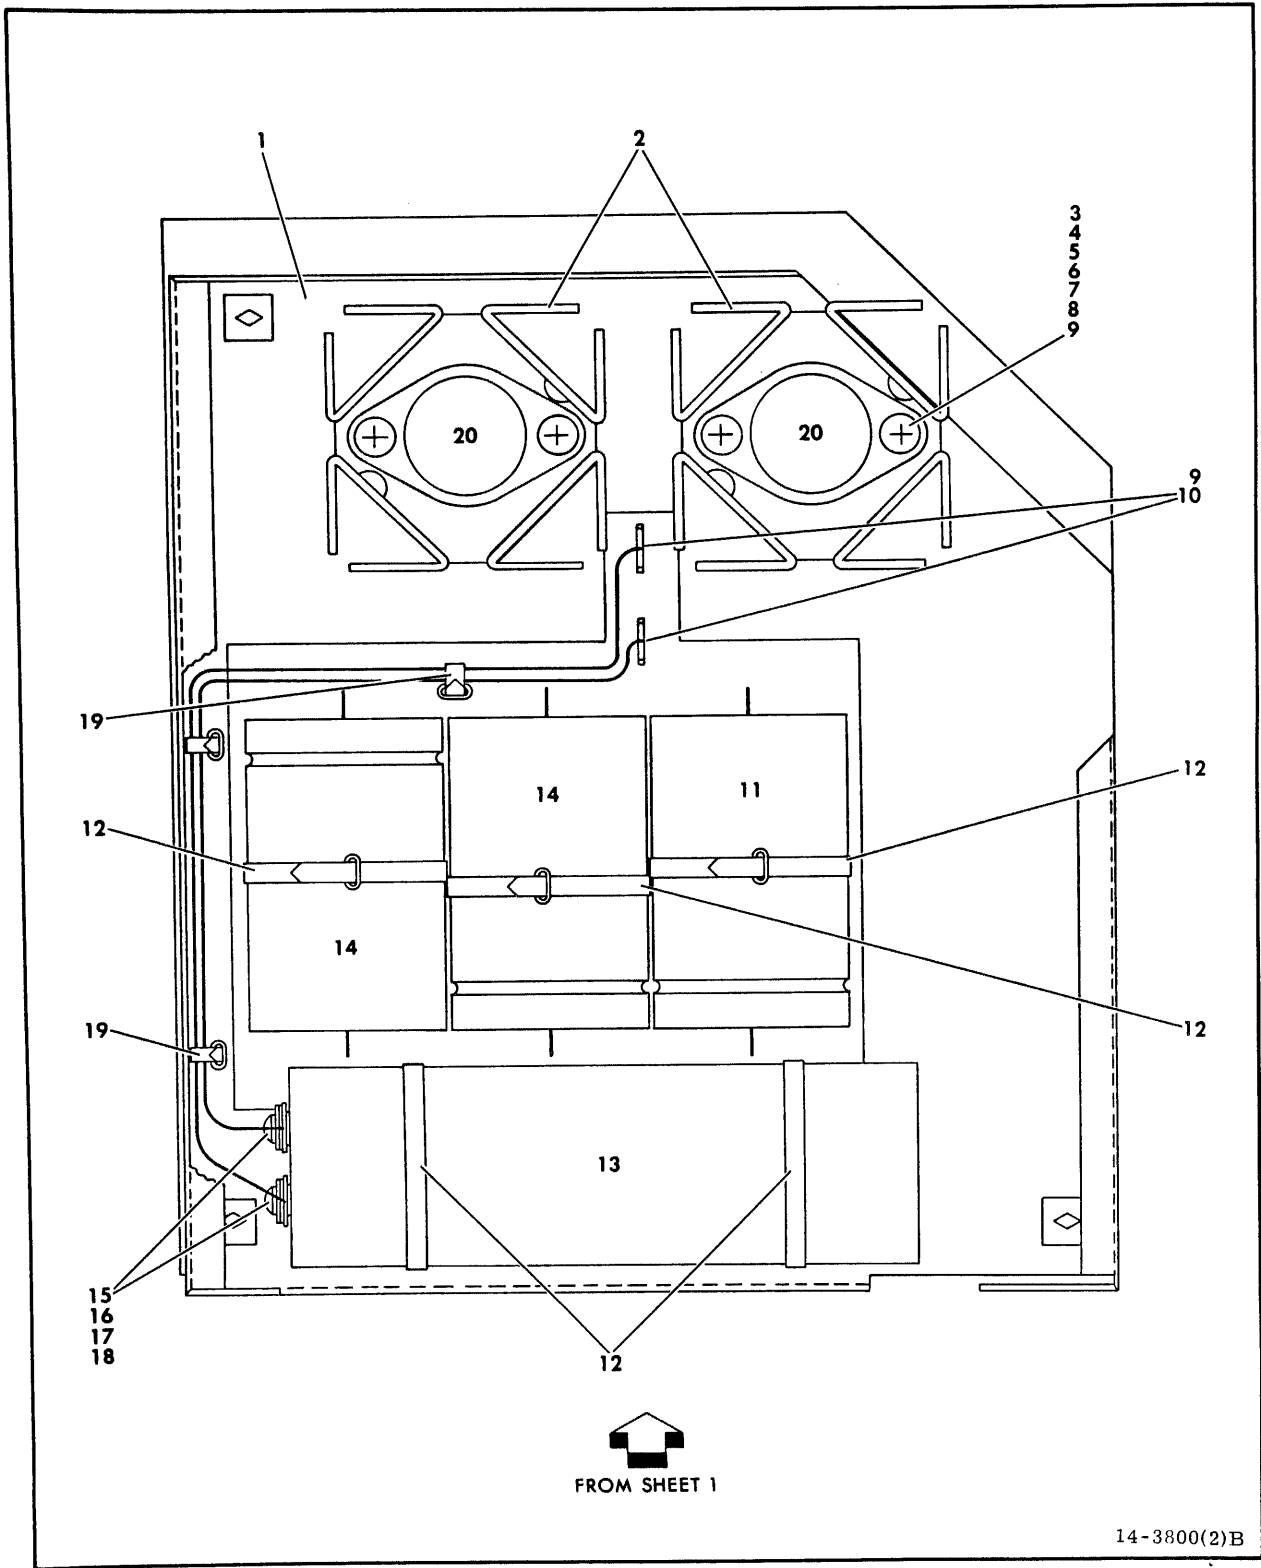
Component Assembly, Type_XKV (Sheet 2)
